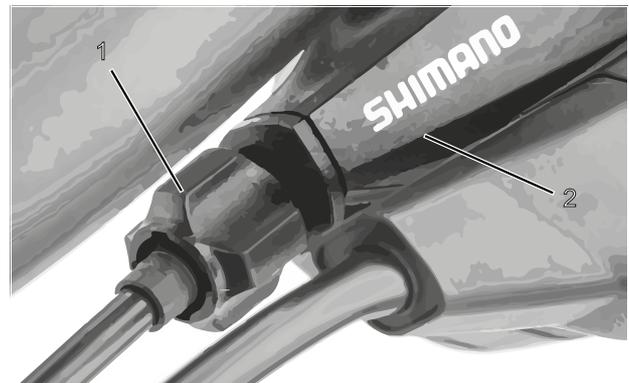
Adjusting sleeve (1) for the single-cable, cable-operated gear shift with shifter housing (2), example
